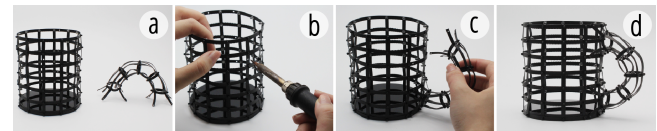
Tinker process: (a) adding one part, (b) making holes, (c) connecting two parts, (d) obtaining second-version prototype.
